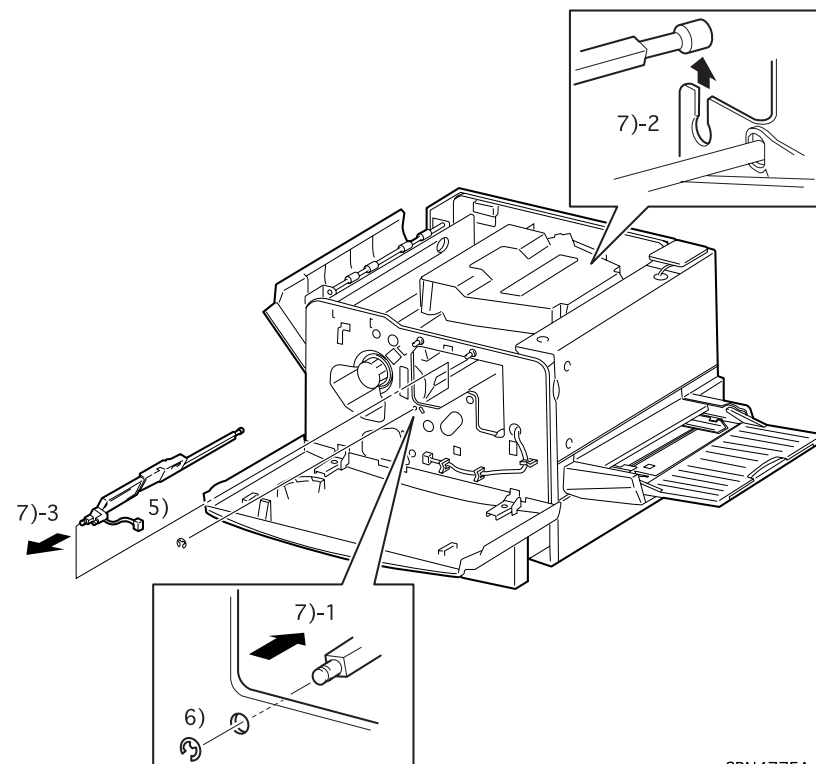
ROS ASSEMBLY Removal (2/2)
